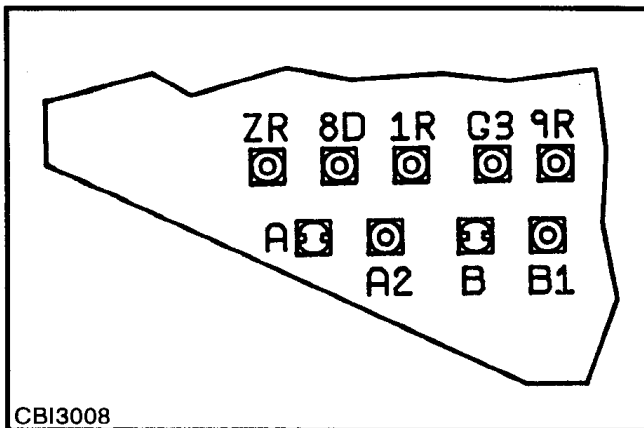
686B623U01 CMF/ZERO PCB ASSEMBLY
